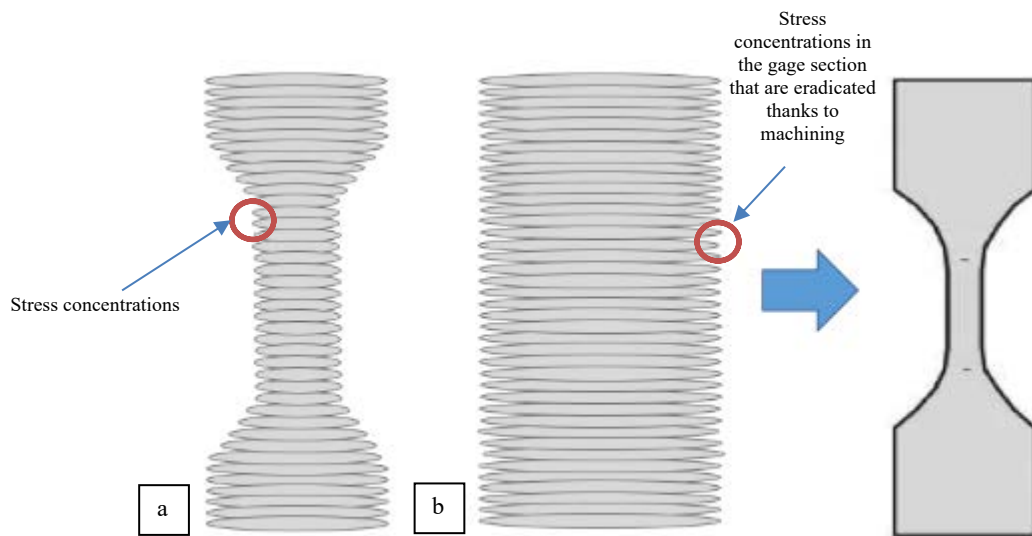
Stress concentrations in tensile coupons: (a) Coupon directly printed using a CAD model with the shape and size required by the standard (b) Coupon machined from a blank to the standard shape and size
